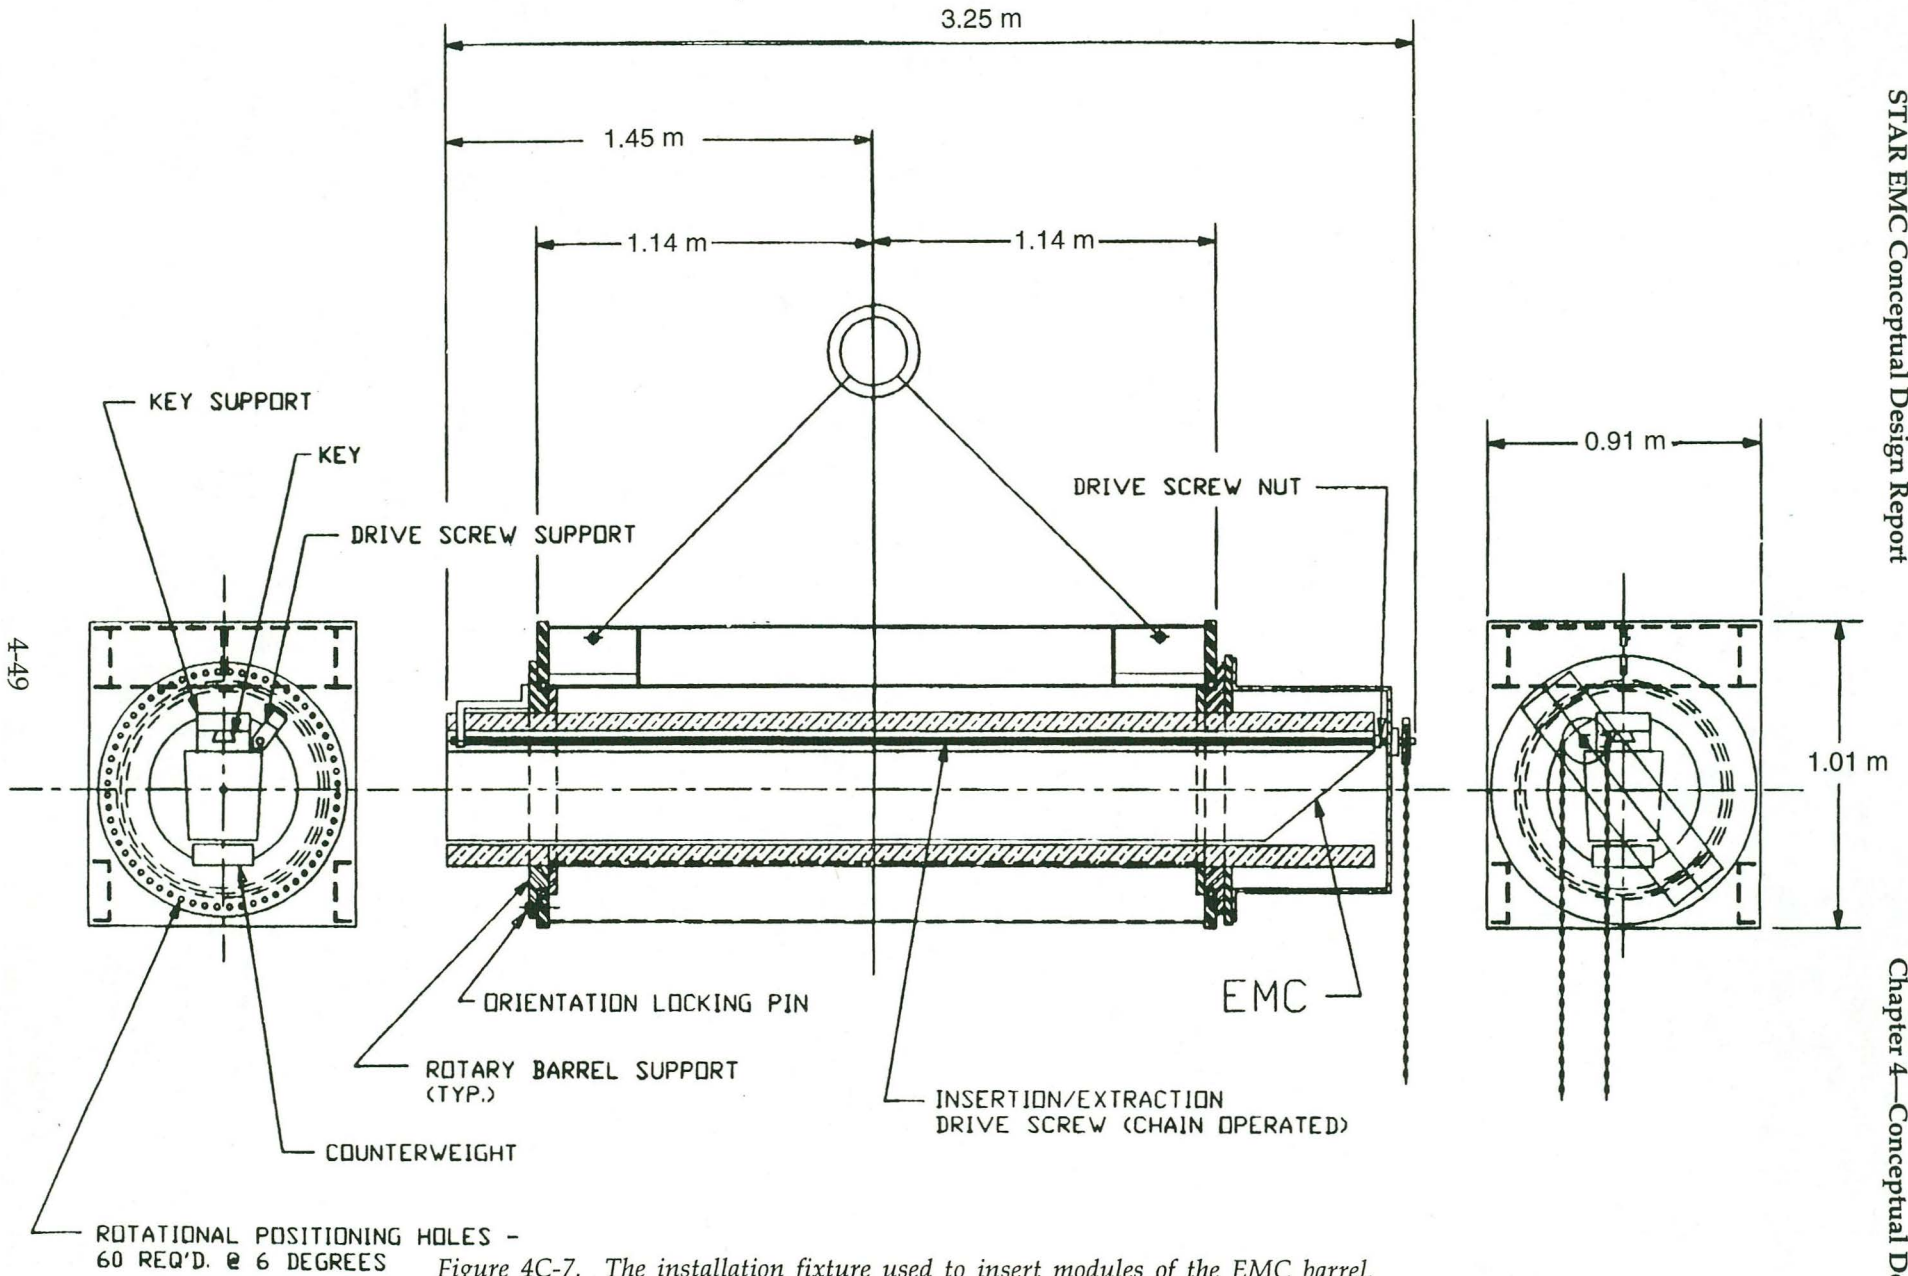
C-7. The installation fixture used to insert modules of the EMC barrel.
